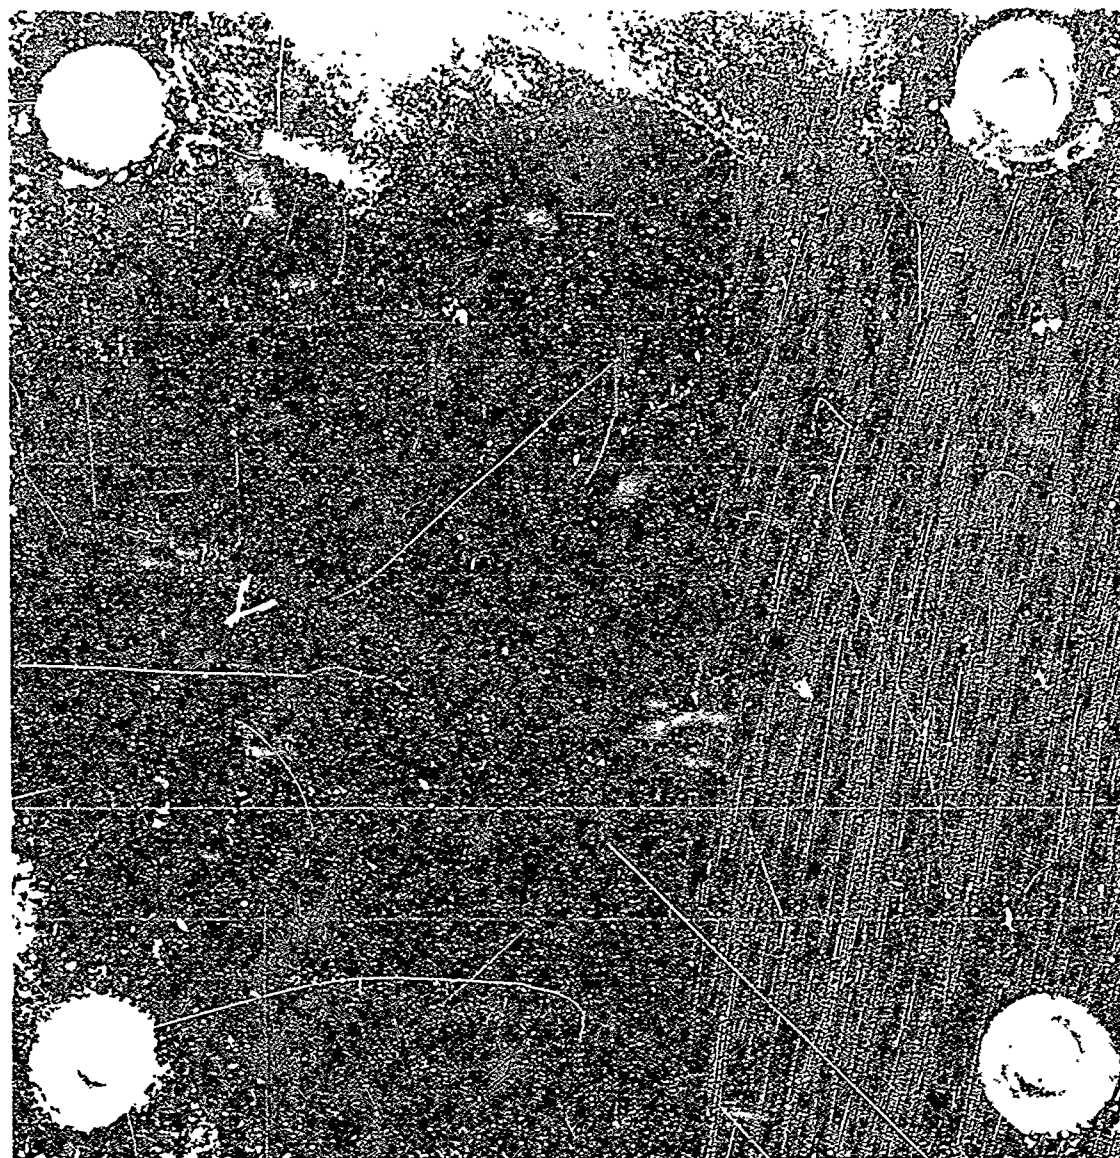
Coating Specimen RSA 64-27 After Test No. 1
